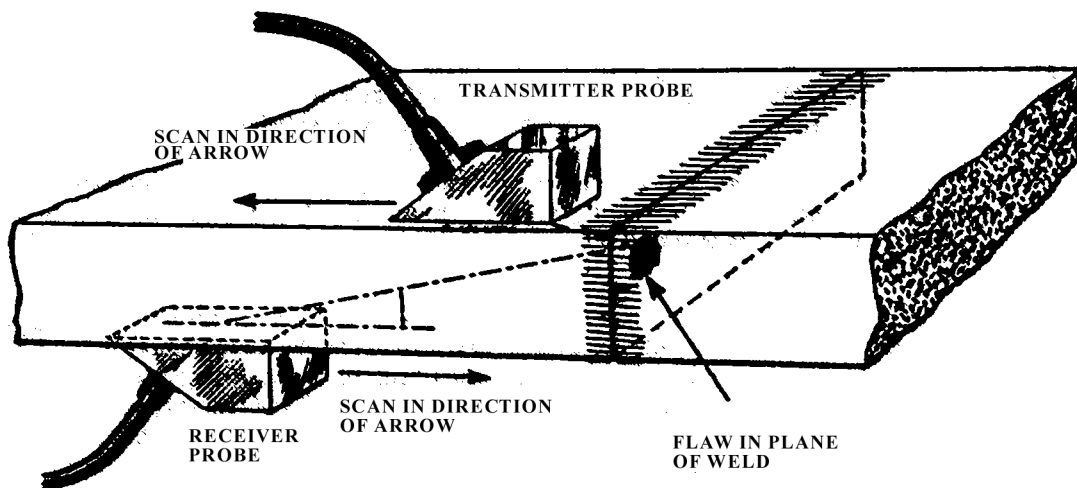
, Scanning method for finding flaws in flash butt welds.
